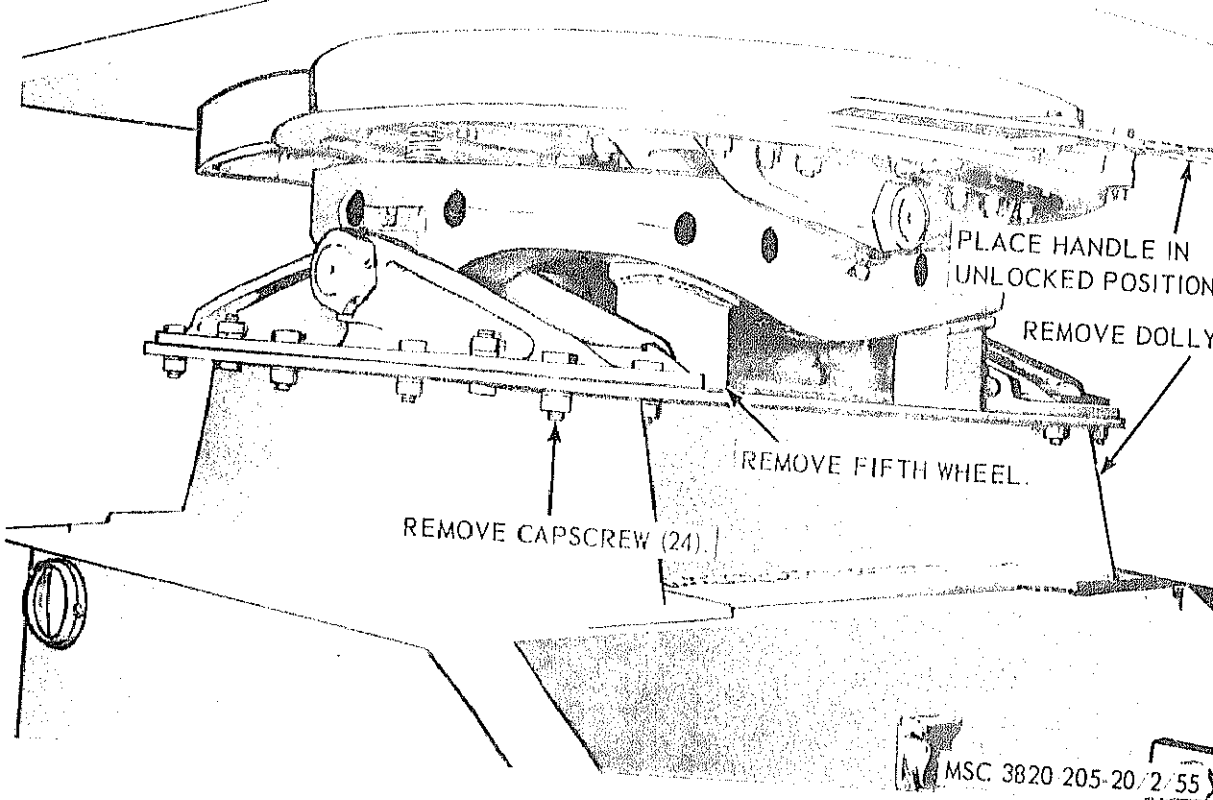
Fifth wheel and dolly assembly, removal and installation.
